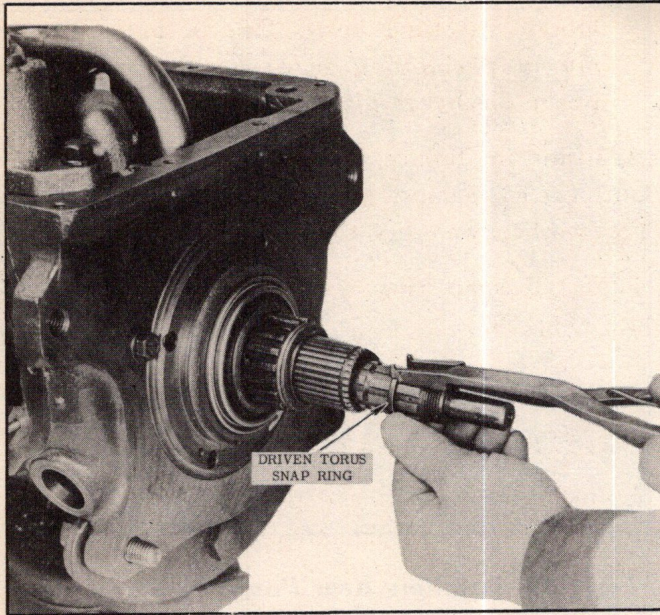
Installing Driven Torus Snap Ring on Main Shaft
